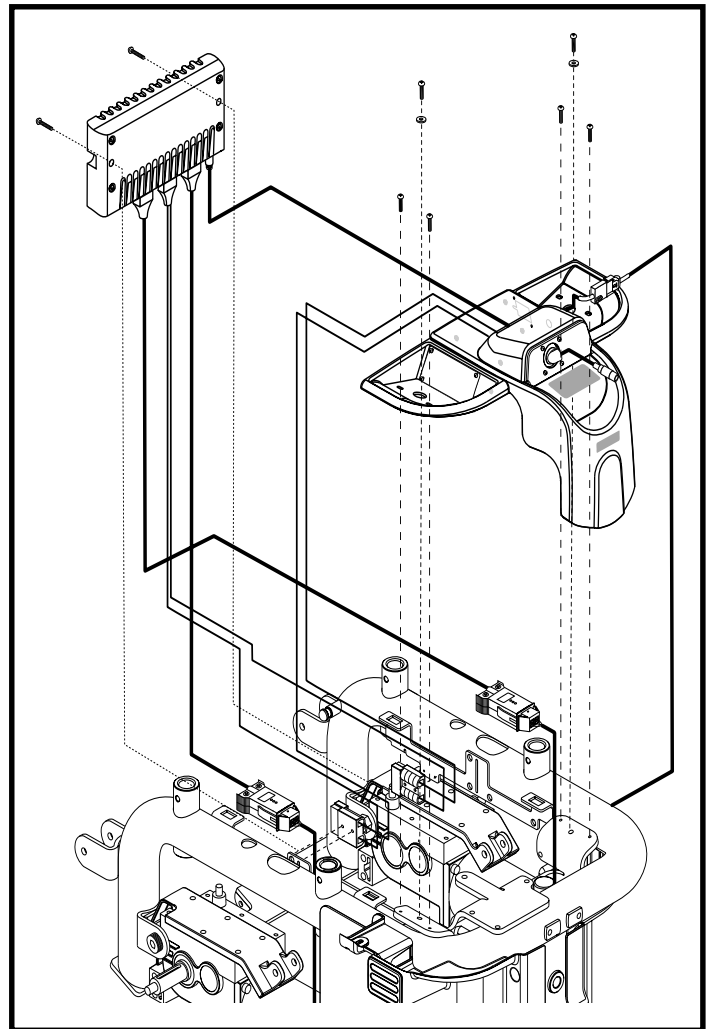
Jazzy 1121 Electronics Tray Disassembly/Assembly
